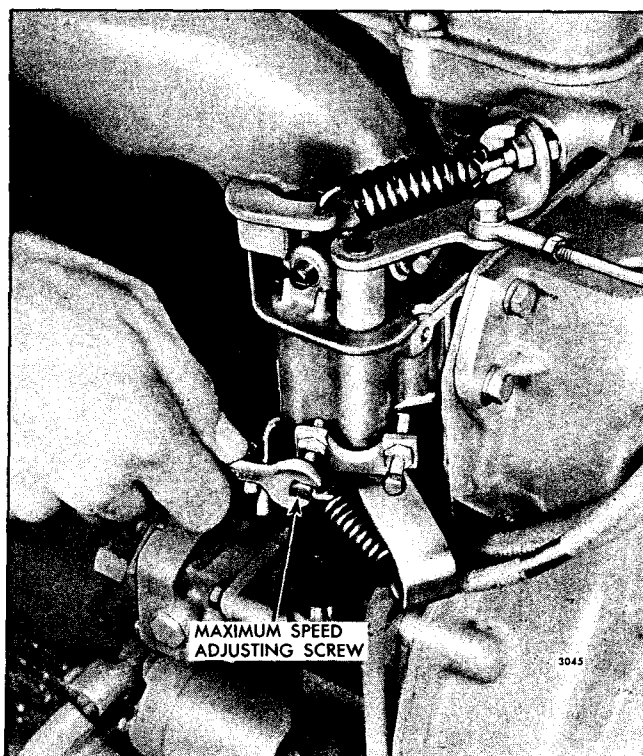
Adjusting Maximum No-Load Engine Speed
